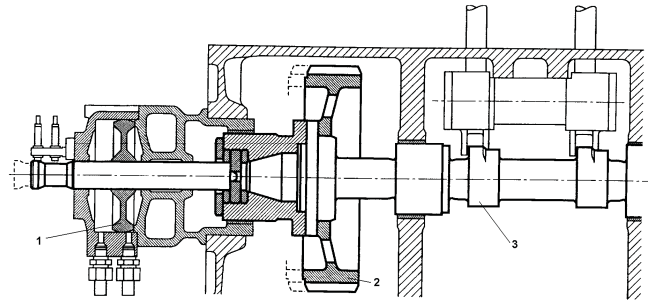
MAN Diesel valve gear timing control system[5]: 1 - hydraulic servomotor, 2 - gear, 3 - camshaft with two sets of different cams
